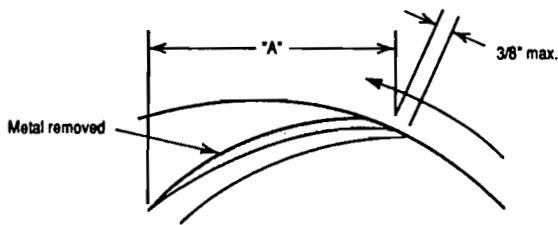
Trimming Impellers—Cutting Vanes Only [3, 9, 10].
